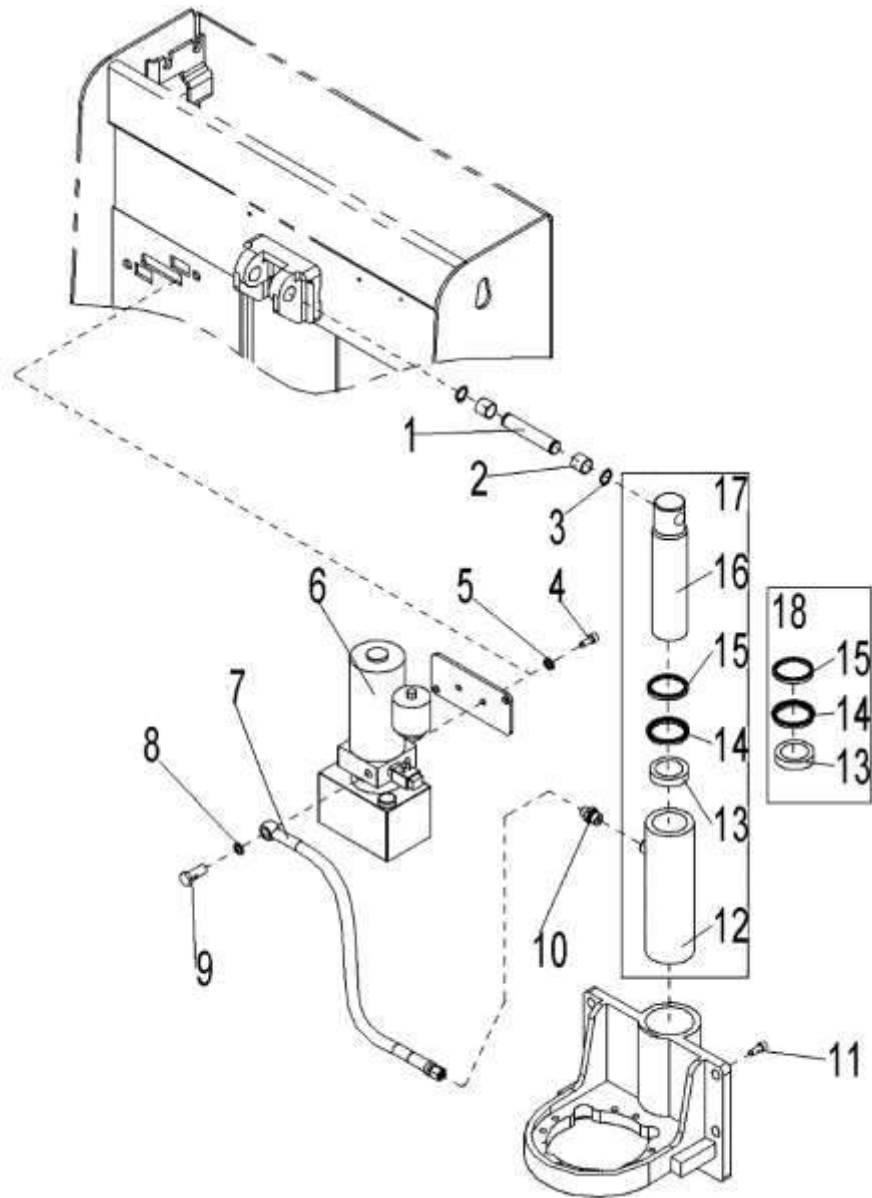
ROTARY-DRIVEN ASSEMBLY
